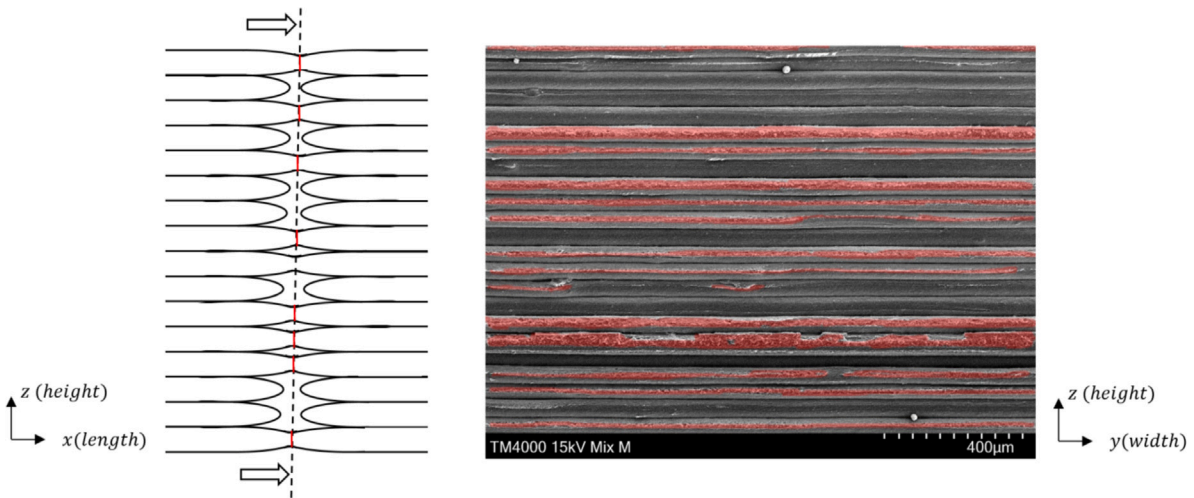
Fractography for the samples printed at 90° with a layer height of 0.05 mm and 1 mm nozzle diameter.
